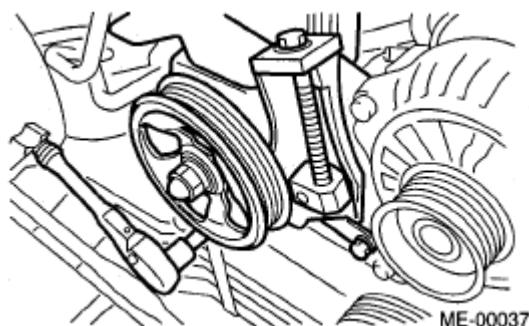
Identifying Power Steering Pump Bracket Bolts
